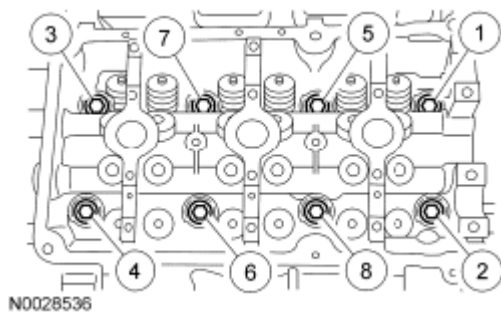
Identifying Cylinder Head Bolts In Tightening Sequence
